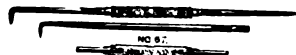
A hook rule for measuring diameter of flanges or circular pieces, through the hubs of pulleys, setting calipers or dividers, etc.
